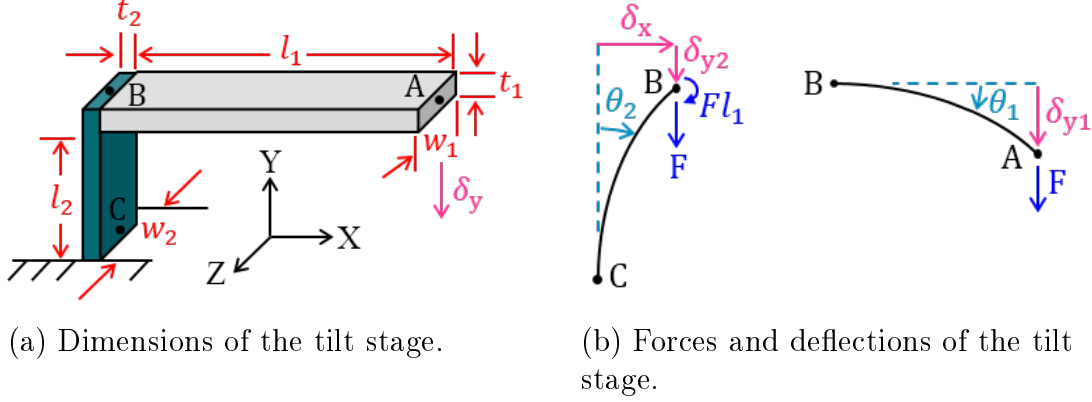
Model of the tilt stage with the top plate as beam 1 and the spring steel strip as beam 2.
